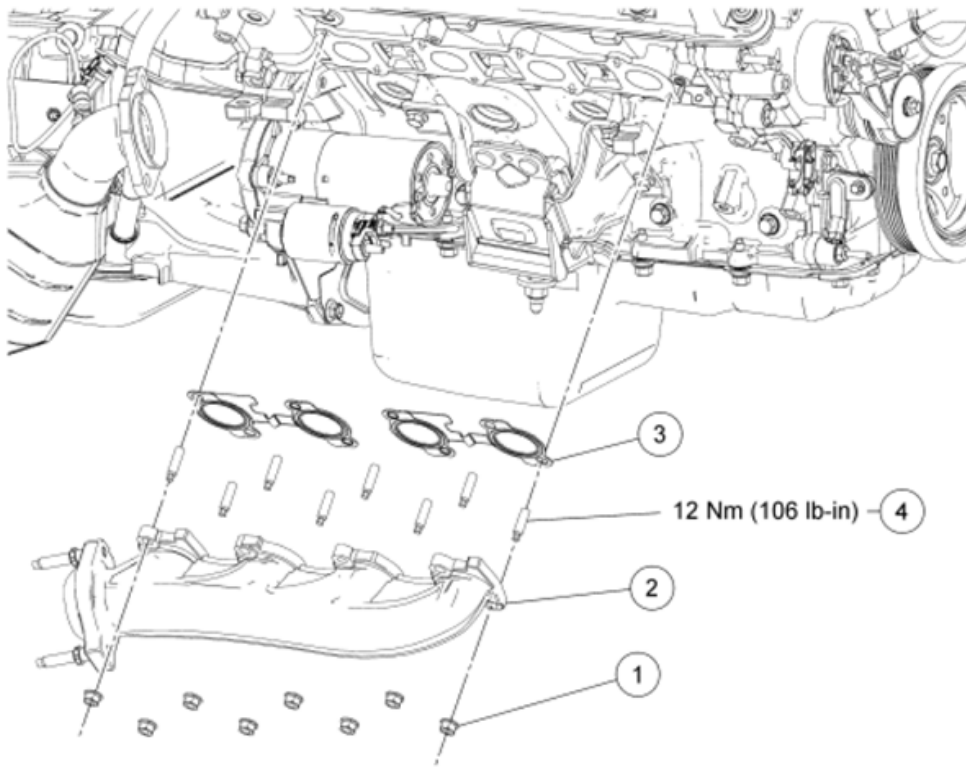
Exploded View Of Exhaust Manifold Components With Torque Specifications - RH (View 2 Of 3)
